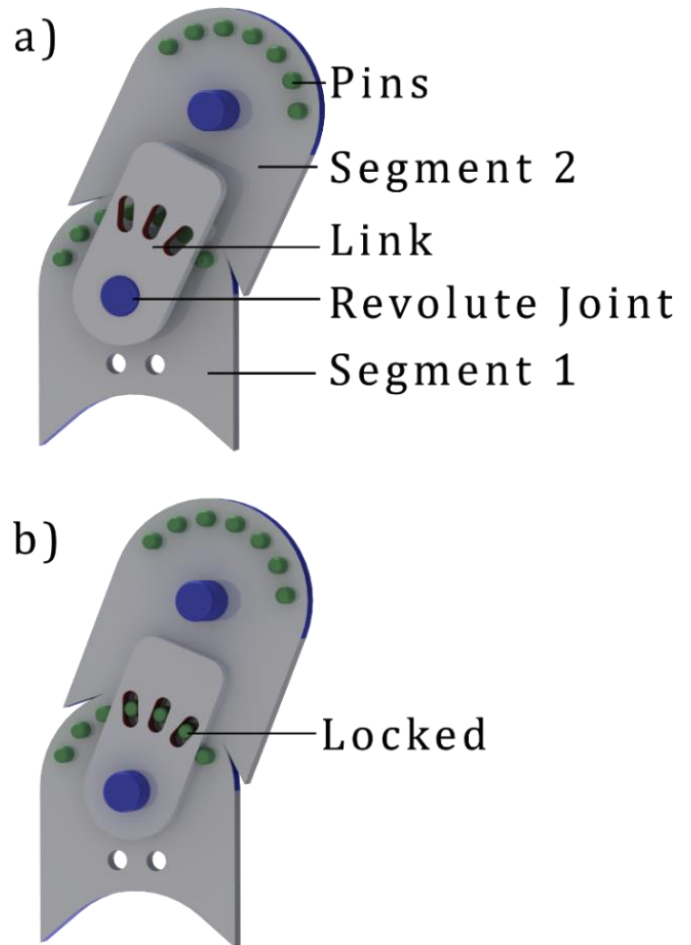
Illustration of The Rotator, rendered in SolidWorks [51]. a) Two memory segments with their parts labelled. Segment 2 attaches to the link and can rotate over the revolute joint. A row of pins surrounds the revolute joint. b) The two memory segments are locked together by pushing the link towards the segments. The slots of the link fall into the pins, locking the position.
